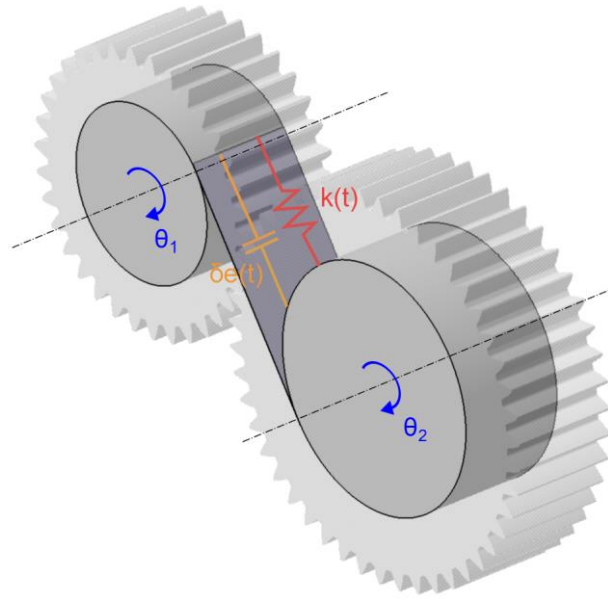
Illustration of a torsional model of a cylindrical gear pair
